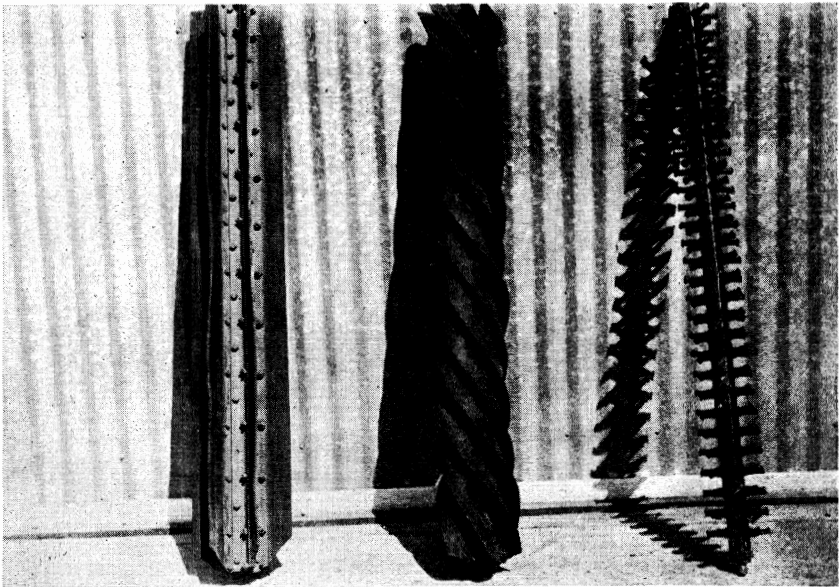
Stripper rolls fabricated from rubber. From left to right: 6 strips of rubber parallel to the roll axis, 6 strips of rubber spirally mounted, 6 rows of rubber fingers.
